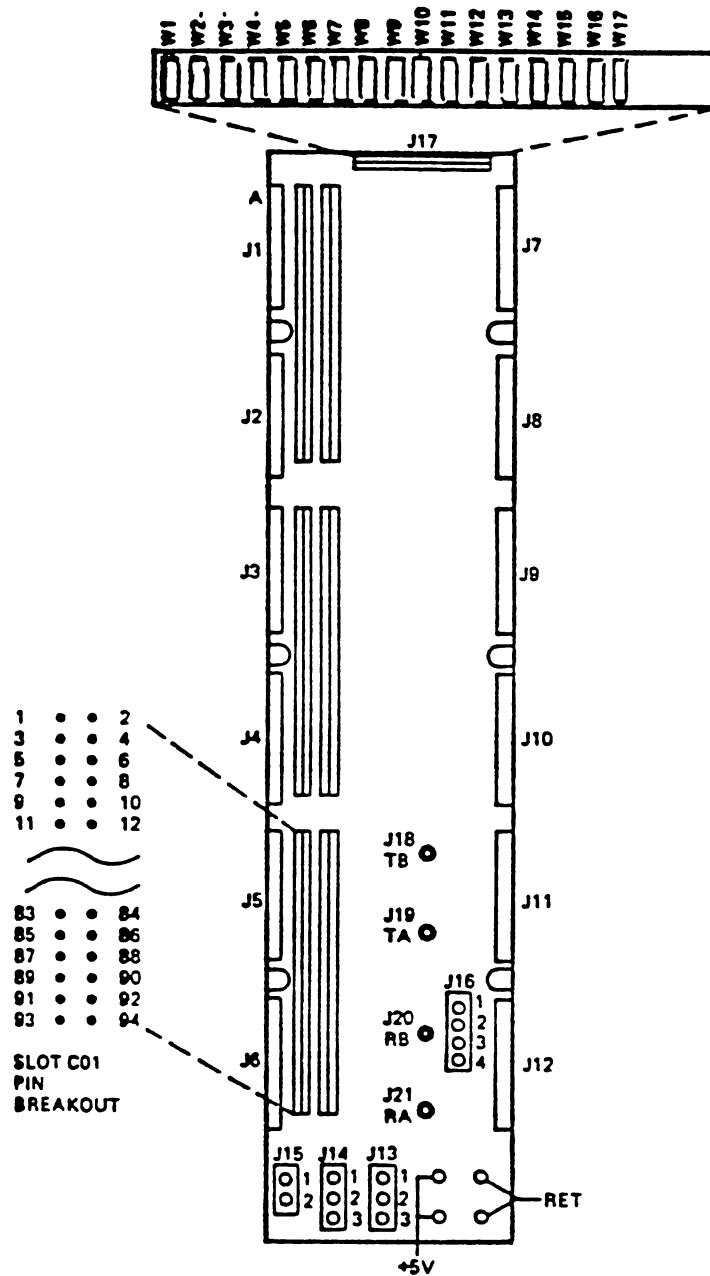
Expansion Cabinet Cable Assembly Connection Details
